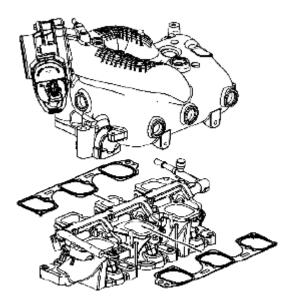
Identifying Throttle Body Bolts Courtesy of SUZUKI OF AMERICA CORP.
